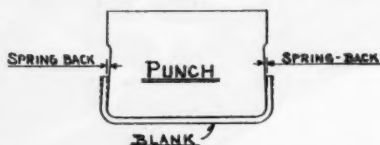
Typical design of bending punch, showing the blank in both the formed and "sprung" positions.
